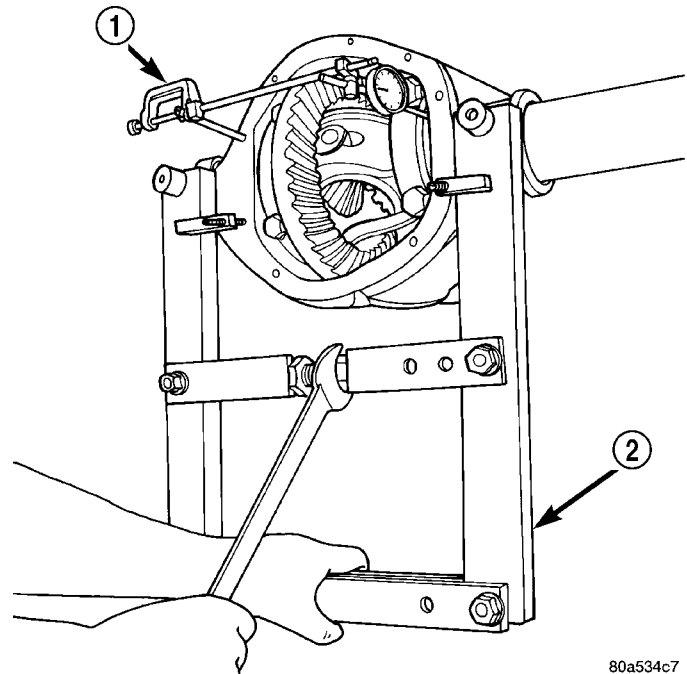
SPREAD DIFFERENTIAL HOUSING
